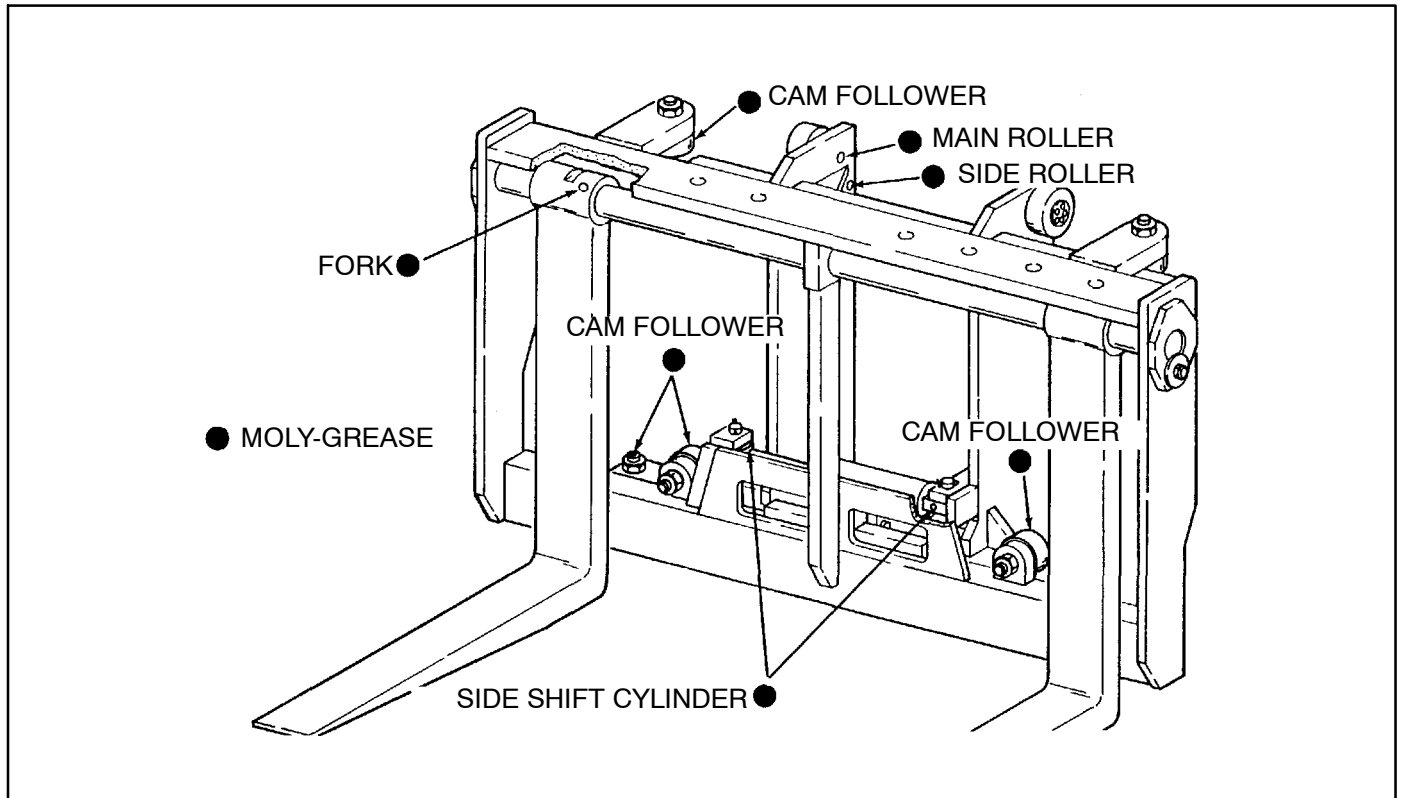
Fully Adjustable Pin-Type Carriage with Hydraulic Side Shift
